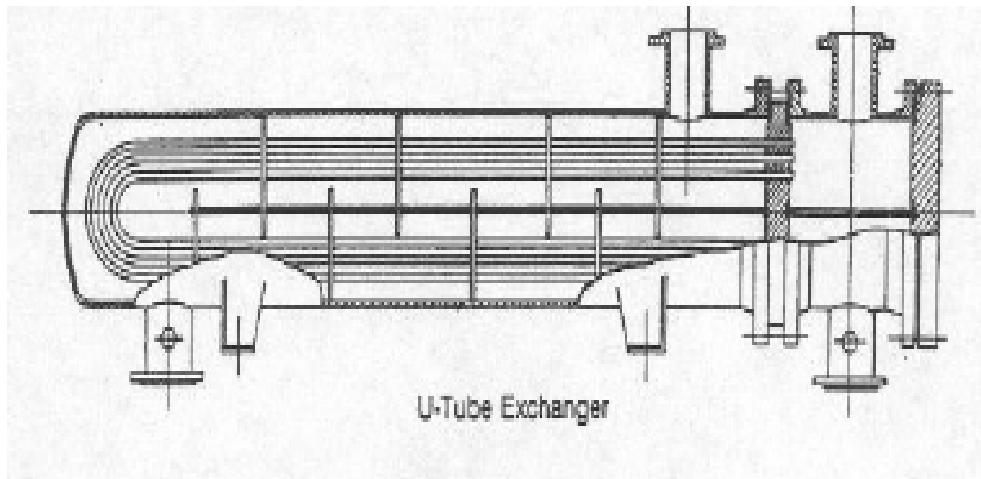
A U-tube, baffled single-pass shell, shell-and-tube heat exchanger.
